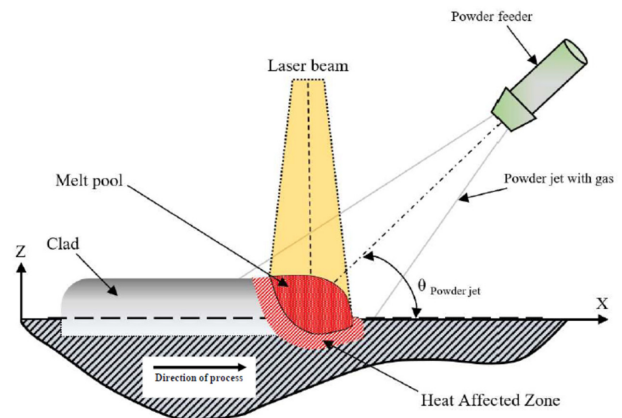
Concept of weld overlay for cladding. Reproduced from [6]
